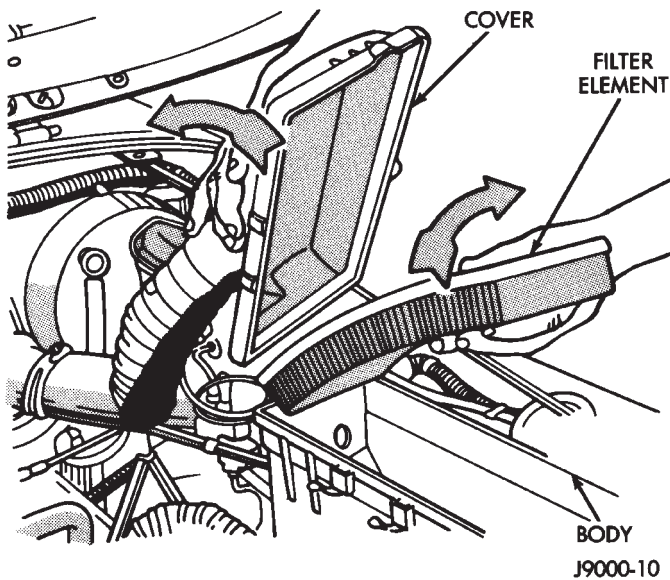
Air Cleaner & Filter Element—2.5L and 4.0L Engines
